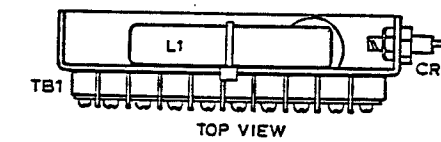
Assembly Detail - NAE39/1 5000 Watt Rf Driver Unit, Top View
